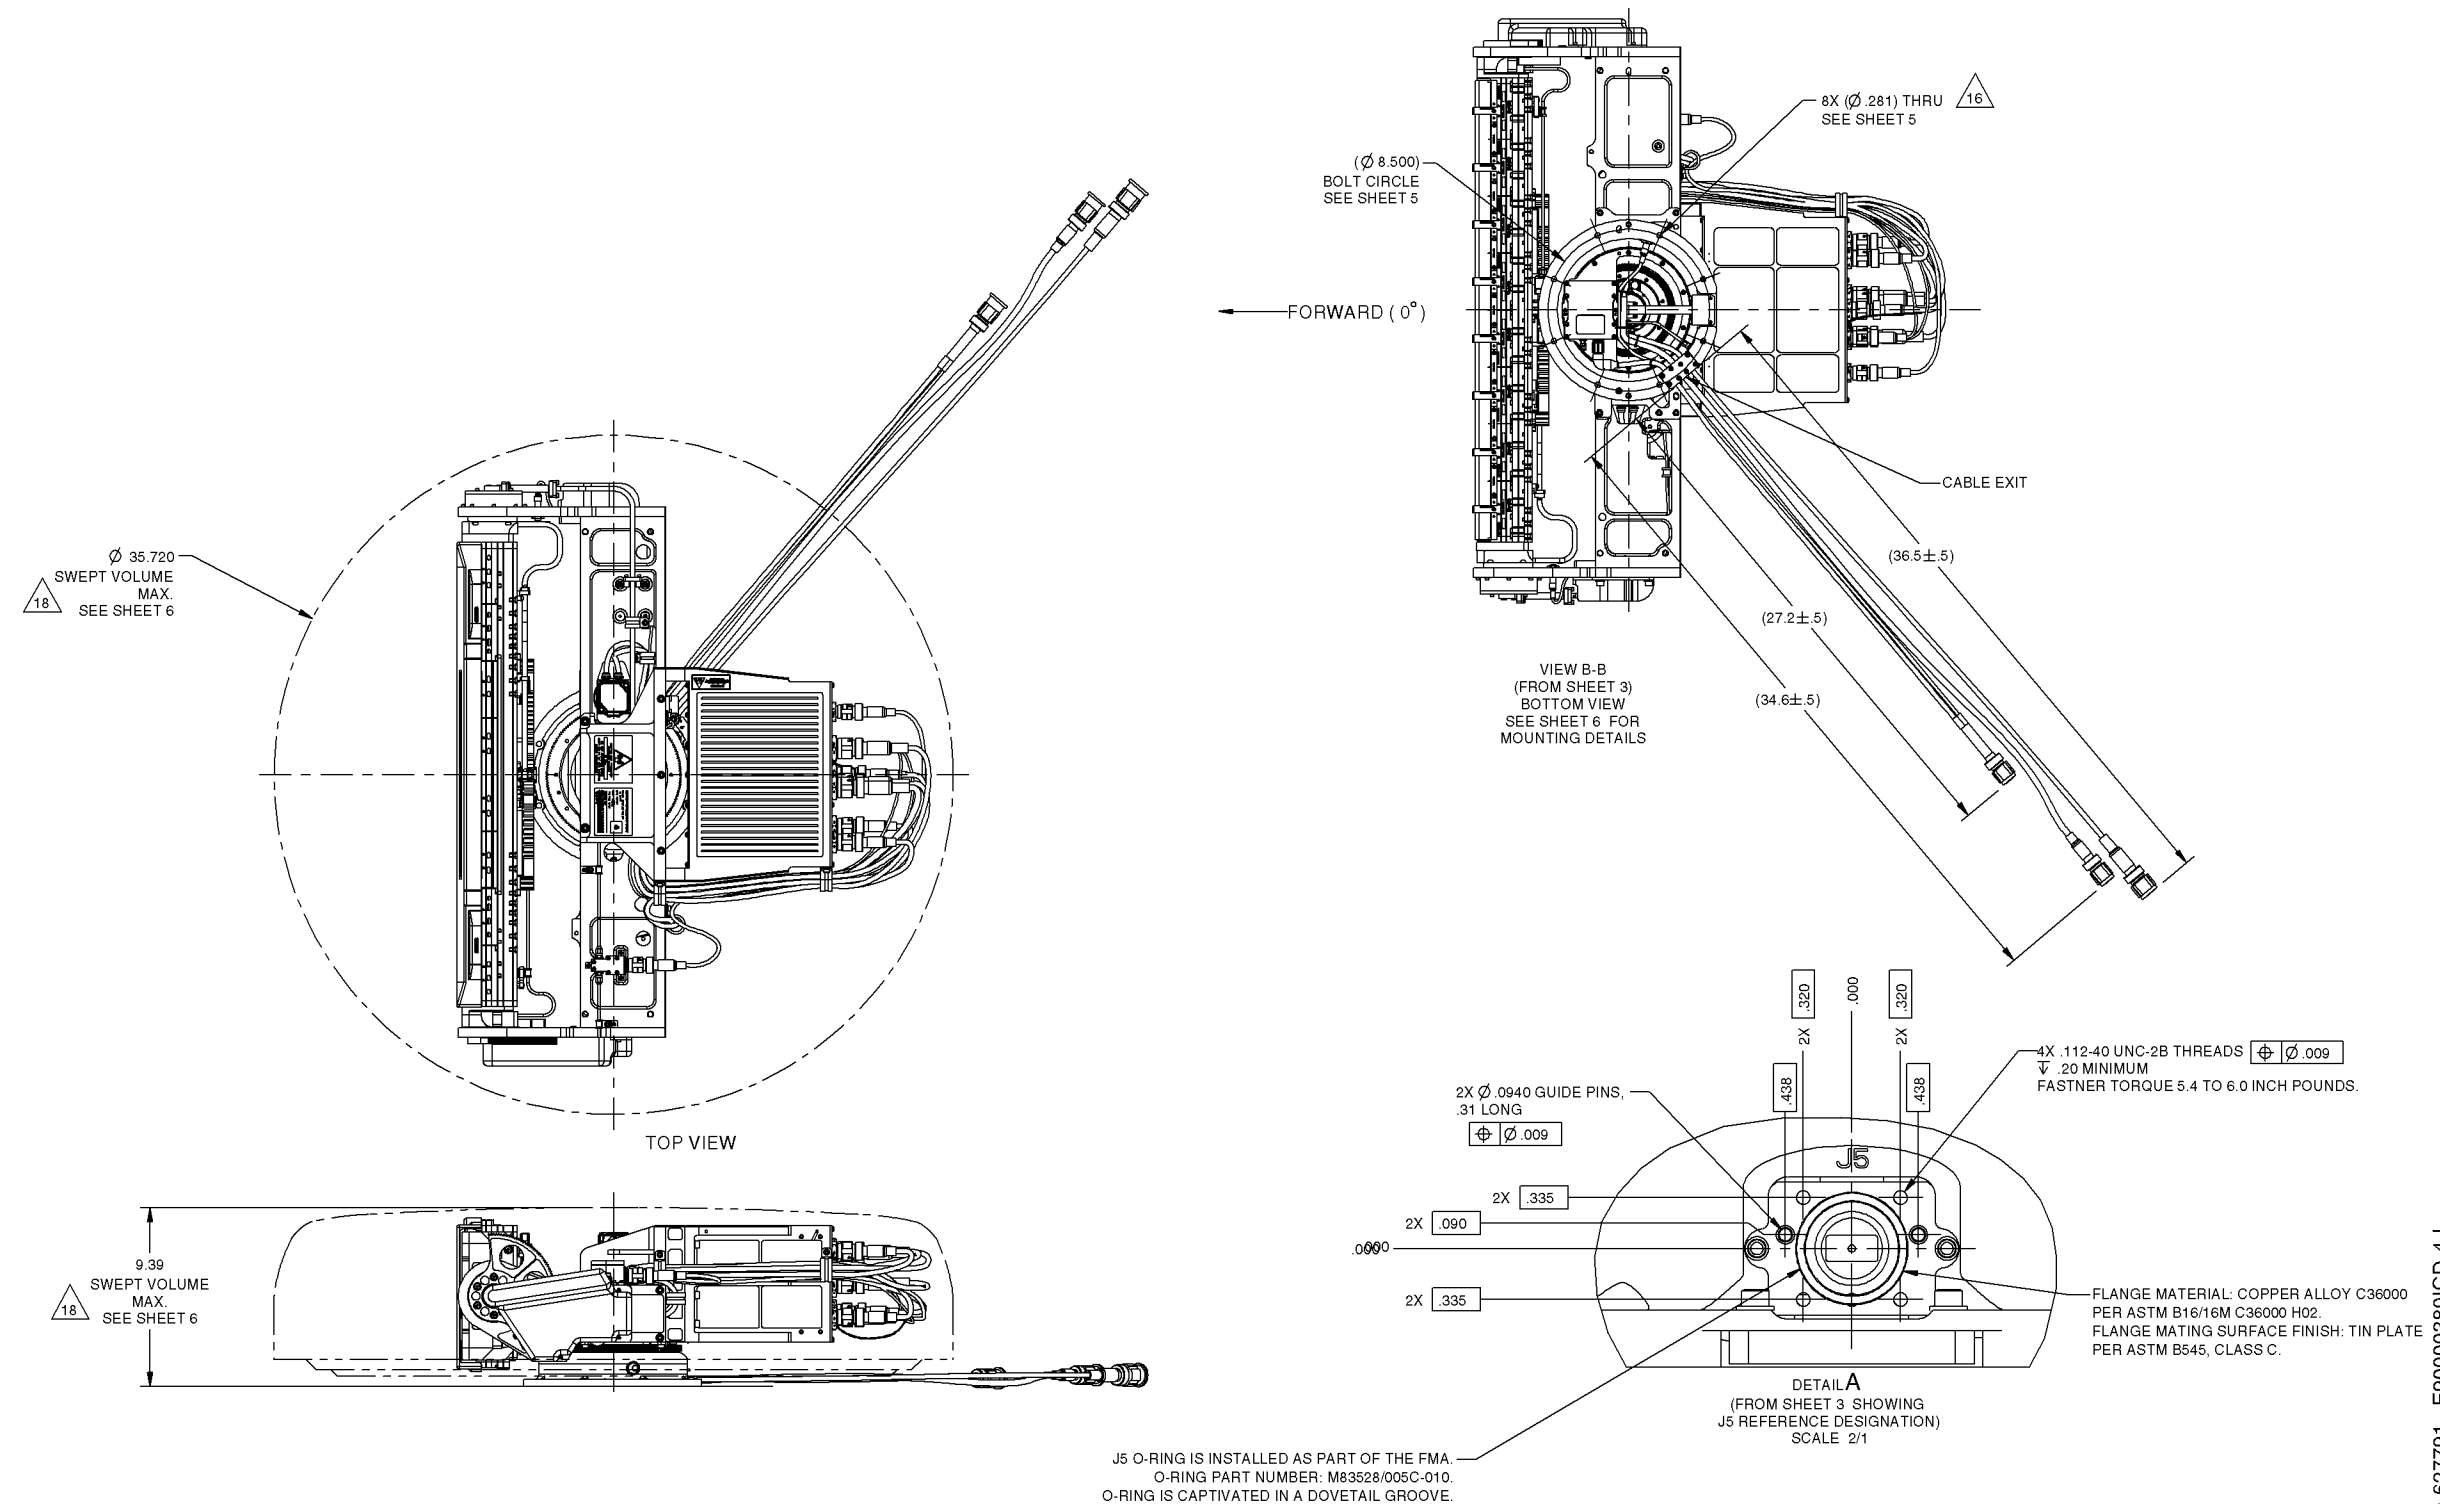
(Sheet 4 of 14) FMA Outline and Installation Drawing (90000380ICD, REV L)
